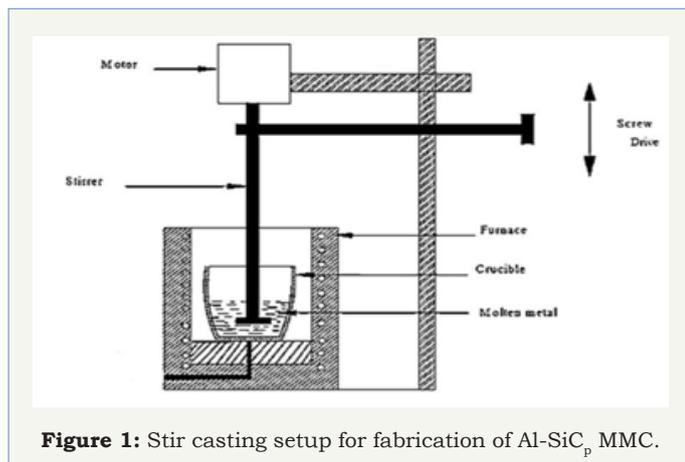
Stir casting setup for fabrication of Al-SiC_p MMC.
